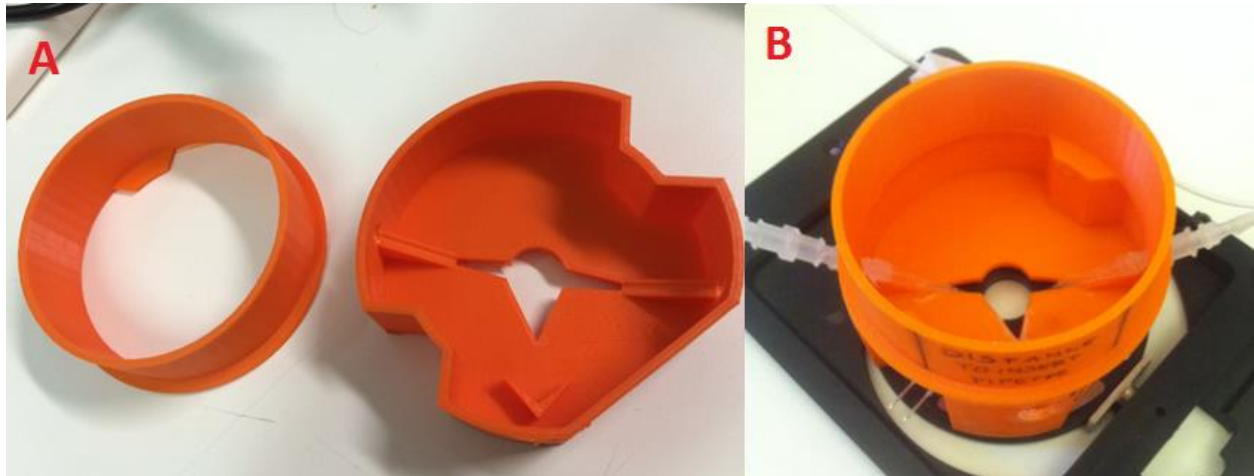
The printed beta design; (A) the two parts of the device after removal from the 3D printer, and (B) the superglued and assembled beta design, mounted on top of the thermal control ring
